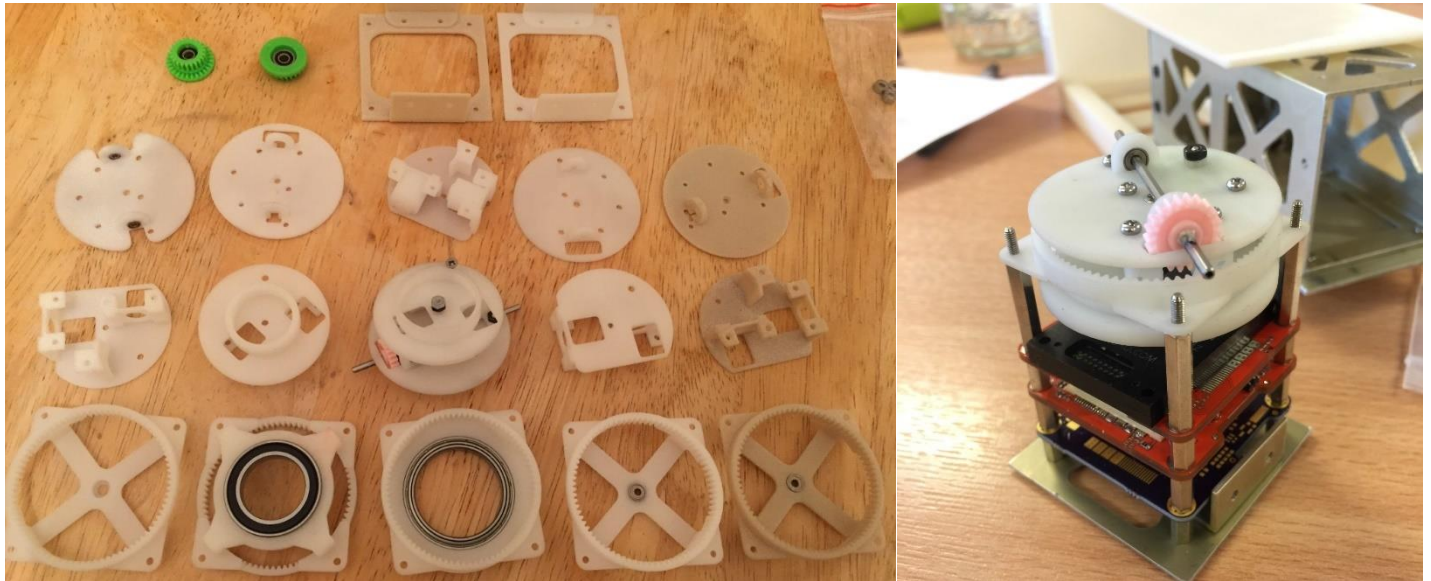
Left: Parts for the gimbal prototyping; Right: Mounting the gimbal with PCBs and threaded rods
